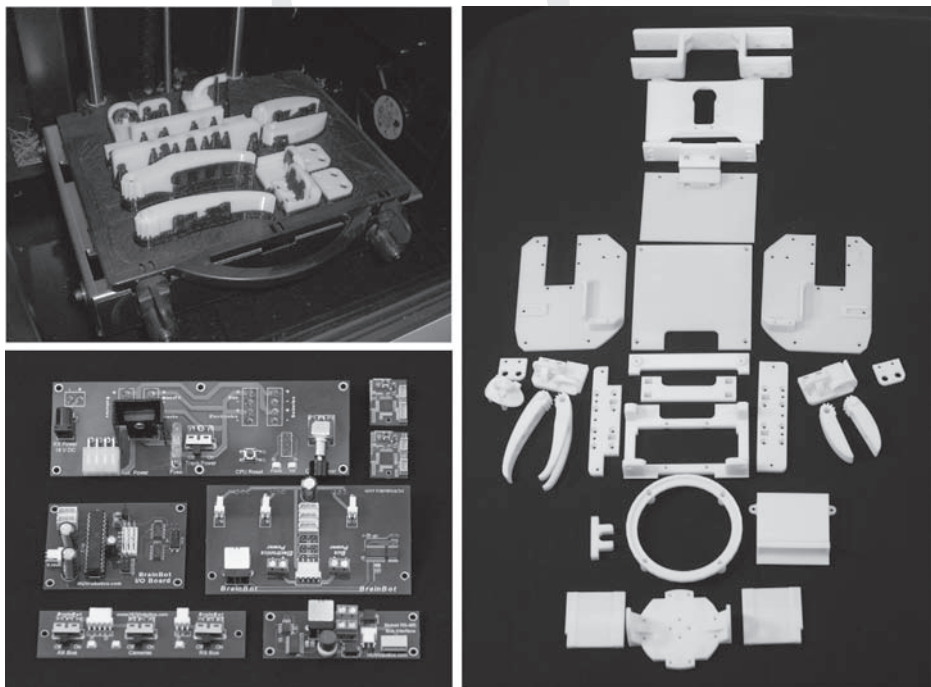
Gripper pieces approaching completion in the 3D printer (upper left), a complete layout of the printed plastic pieces (right) and custom printed circuit boards (PCBs, lower left) are shown. The power board, miniature IO boards (top), standard IO board, AX-12 bus board (middle), power switch board, and RX-64 bus board (bottom) can be seen.
